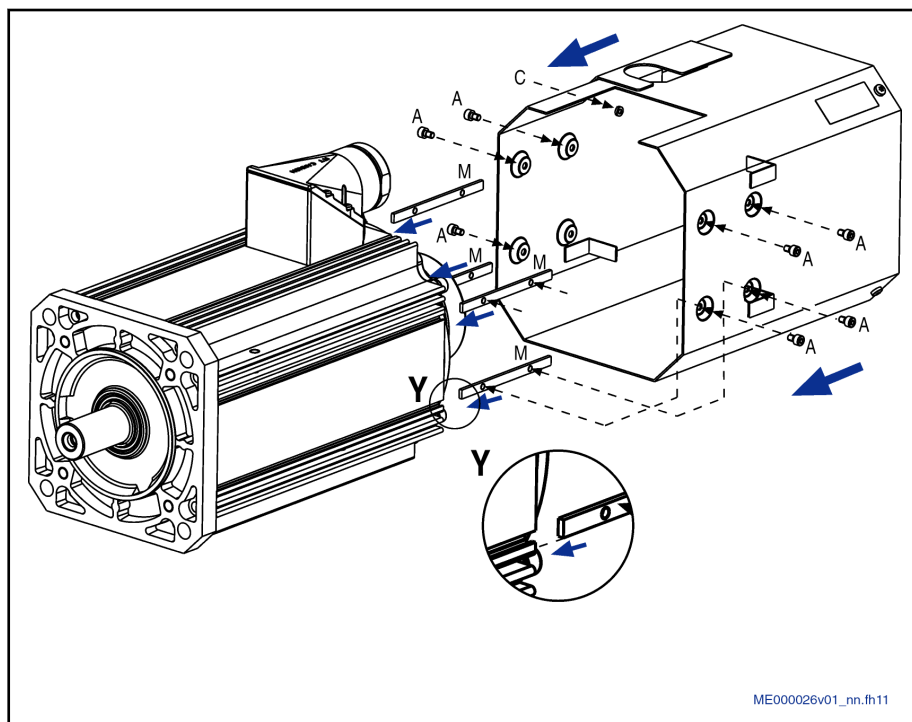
Assembly Fan Unit Axial, Flange Dimension 192
